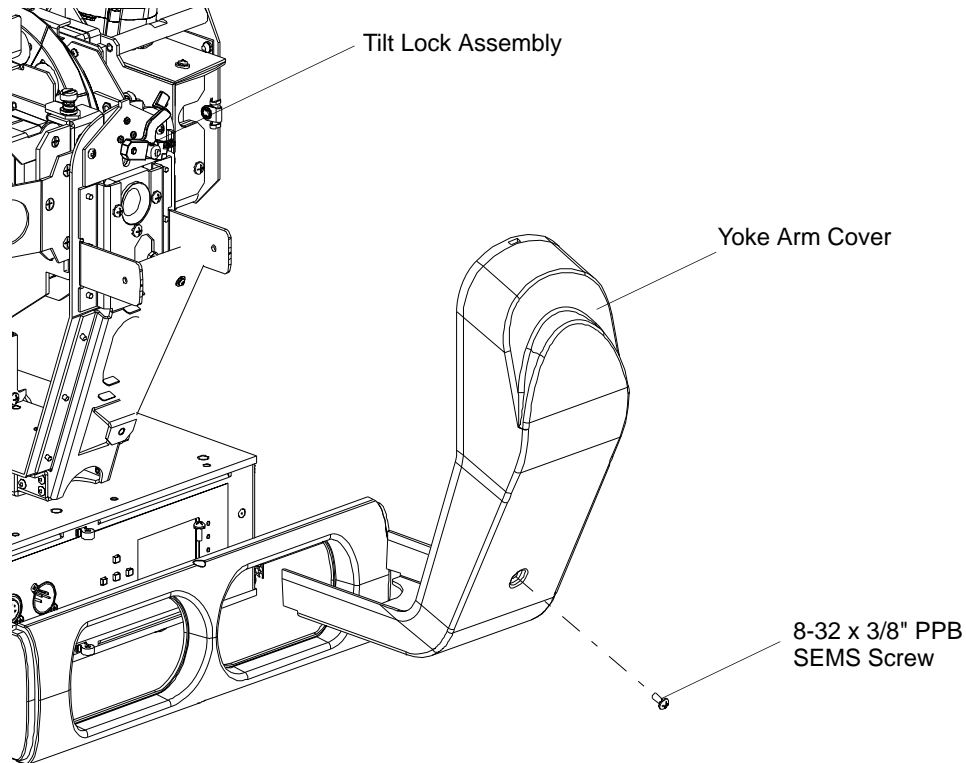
Tilt Side Yoke Arm Cover Removal
